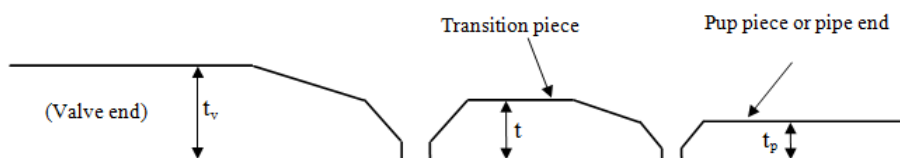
Typical Assembly Detail (Valve Termination shall have a Minimum Thickness in accordance with ASME B16.34)
